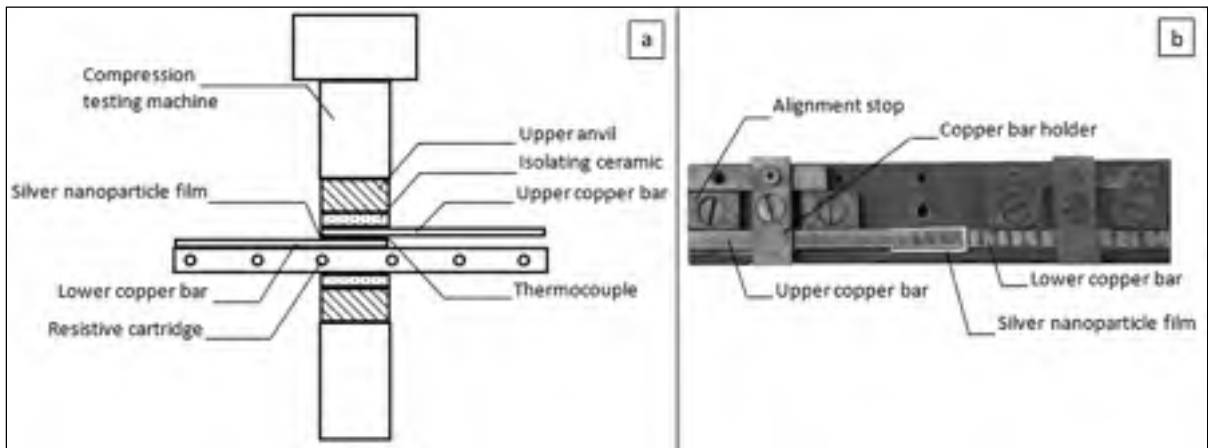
Sintering setup: (a) Side view of the clamping setup used for sintering, and (b) top view of the sintering assembly fixture
